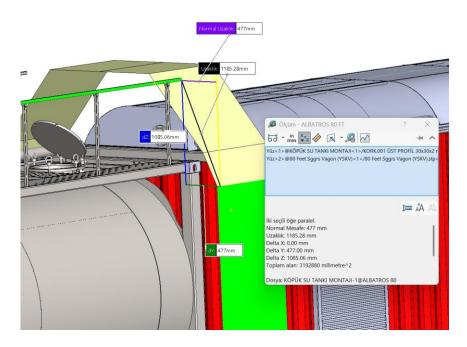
Guardrail arrangement on ISO tank prior to envelope (clearance) testing.
